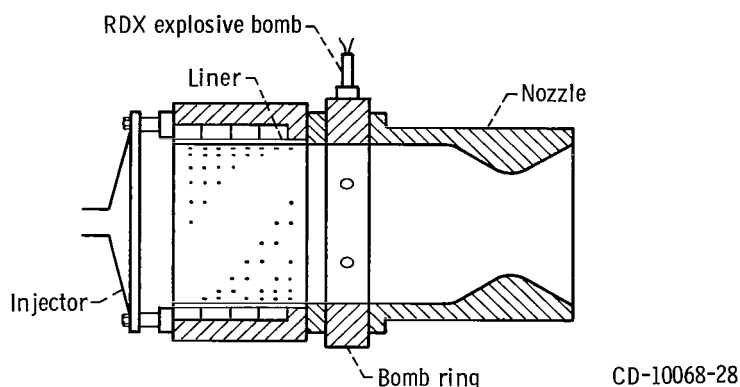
Cross-sectional view of thrust chamber showing arrangement of components.
